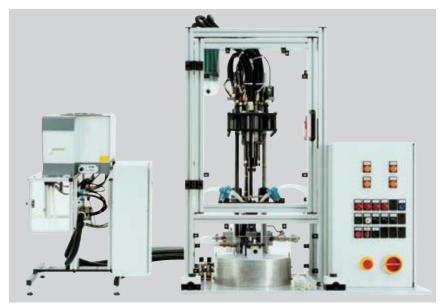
Conveyor integrated 4-Spindle Screwdriving Station with automatic feeding for the assembly of an instrument panel. Because of the varying height of screw-positions, the spindles are mounted to several screwdriver-plates.
